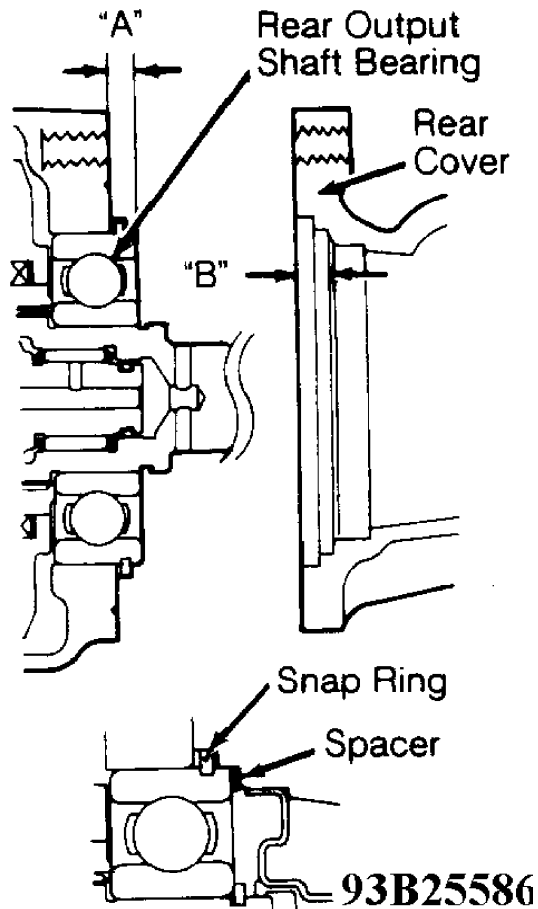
Measuring Rear Output Shaft Bearing Clearance (Montero)
